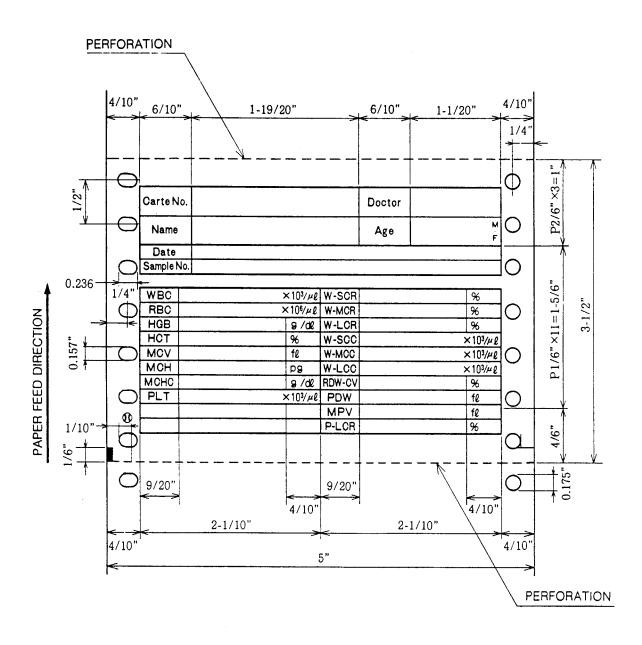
Dimensions of Print Ticket No.20 (unit in inches)
